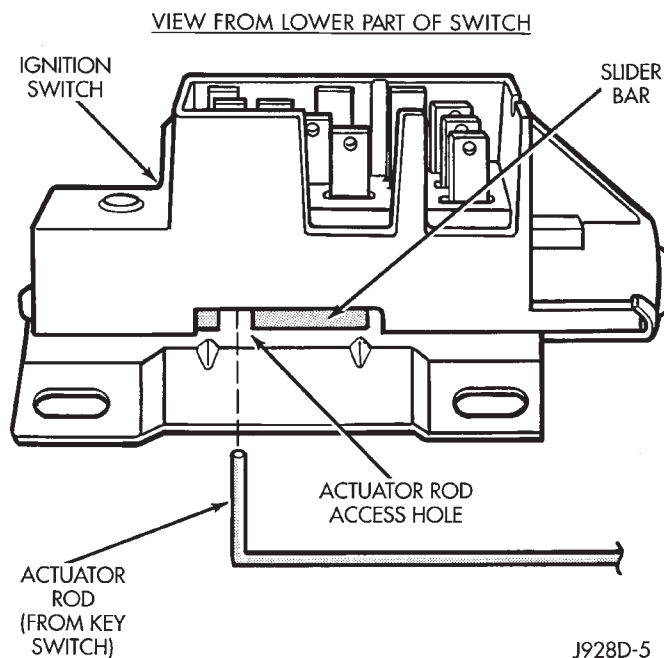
Ignition Switch/Remote Actuator Rod—Typical
